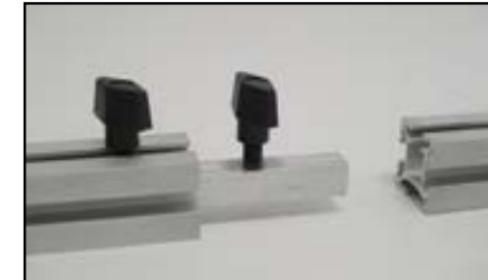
Detail C: A rectangular connection bar with plastic T Knobs is inserted between two horizontal extrusions joined end-to-end. Turn the knobs clockwise to tighten. Do Not Overtighten.
